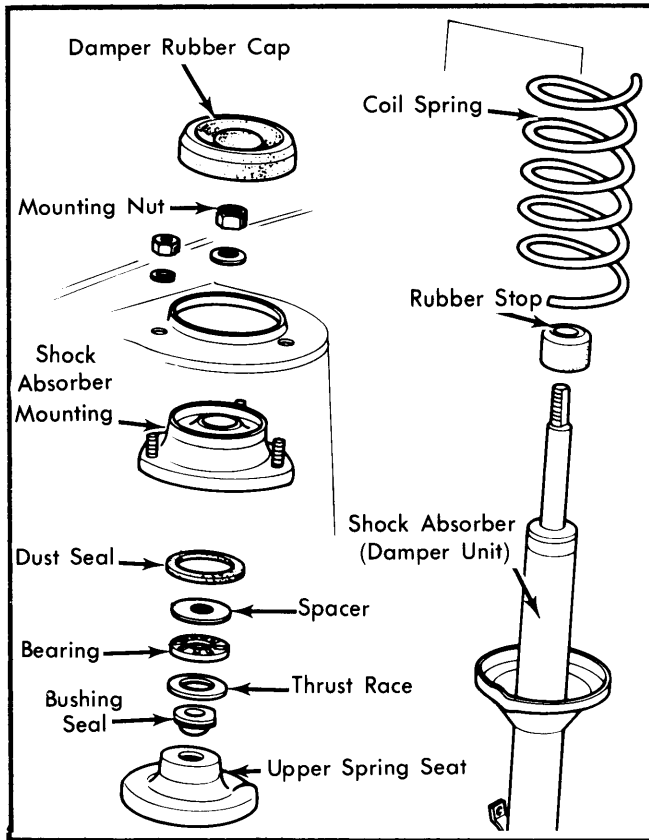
Exploded View of Honda Strut Assembly (Accord Shown; Civic Models Similar)
